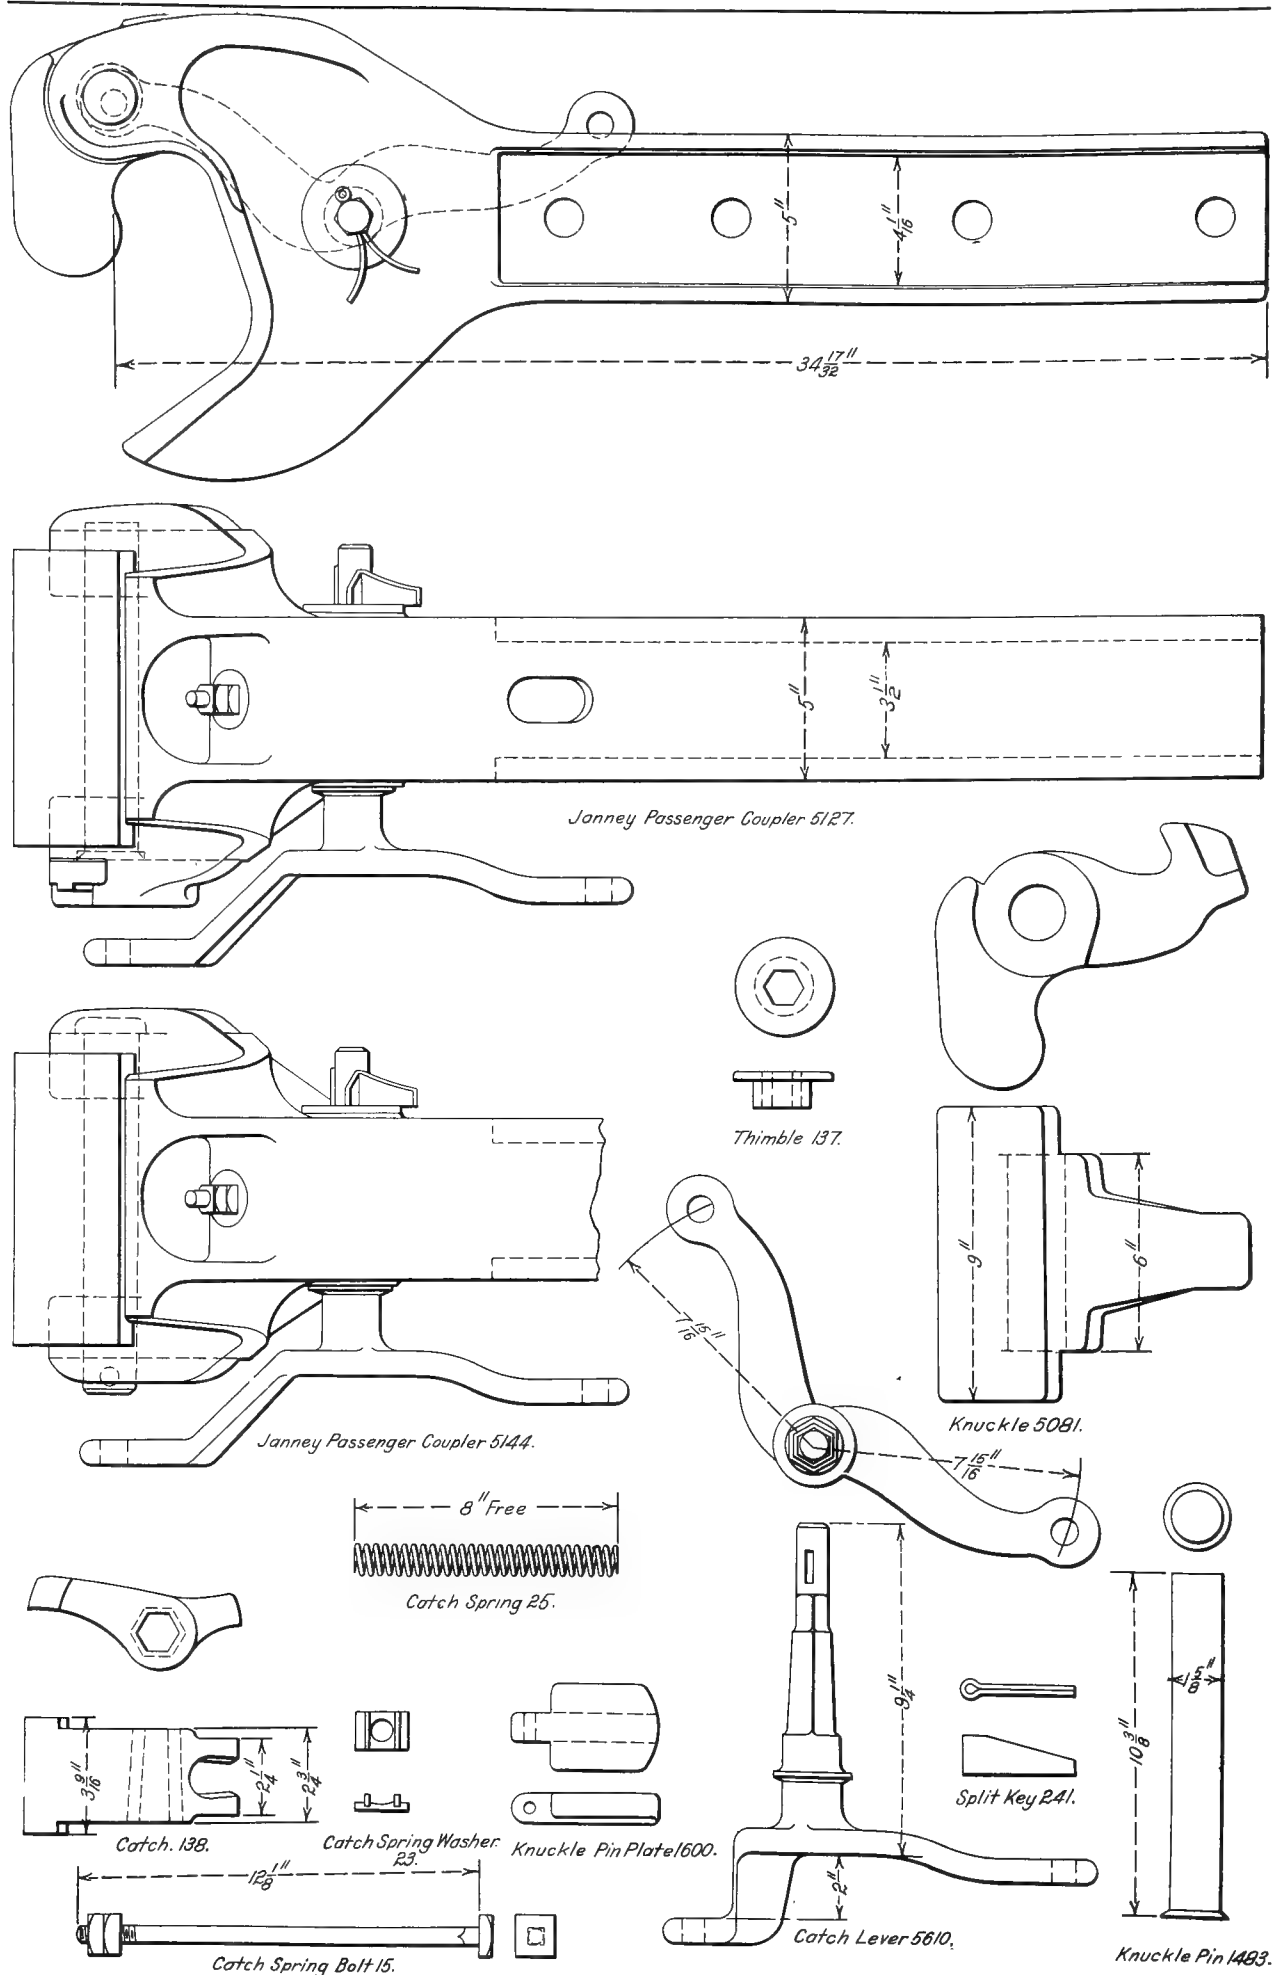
Janney Passenger Couplers and Parts. McConway & Torley Company.
